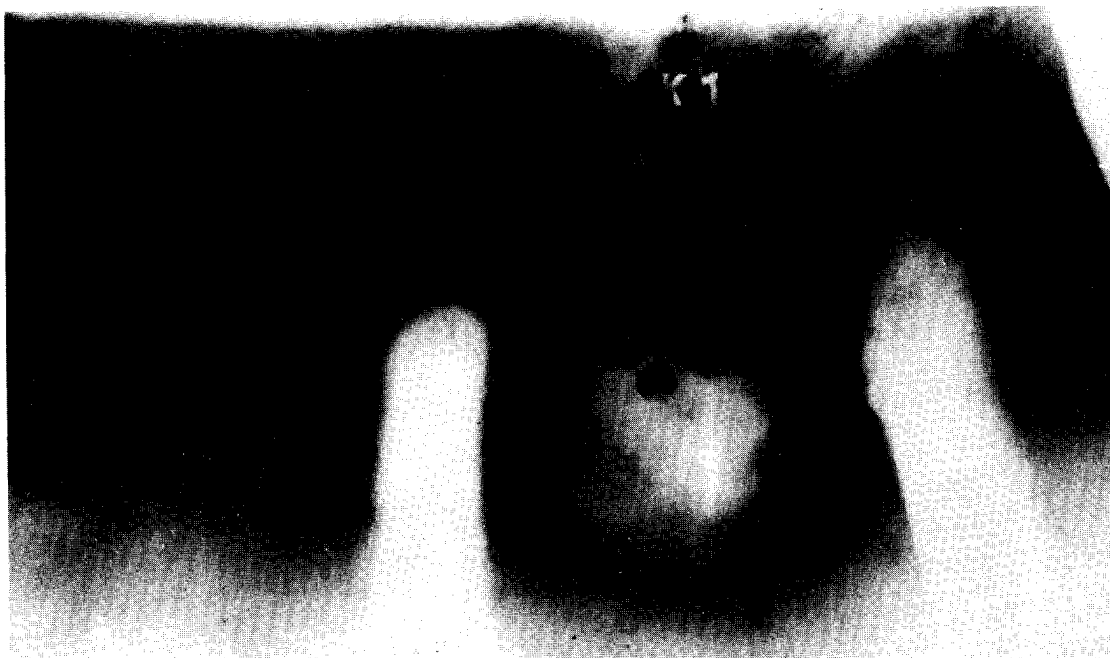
Radiograph of repaired area of casting, wall thickness 1". (An attempt had been made to remove shrinkage pipe by drilling holes and filling these with welding. Holes are not properly filled and weld has cracked extensively).
